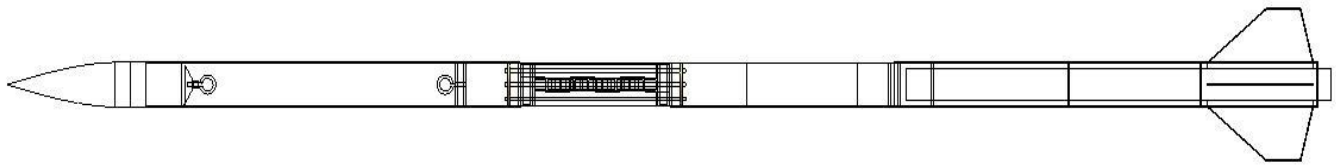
Side View Drawing of Rocket--Generated in SolidWorks 2007
